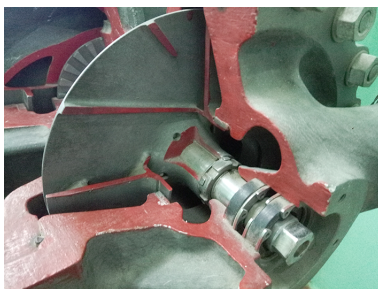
Centrifugal pump impeller with straight blade in relative motion
